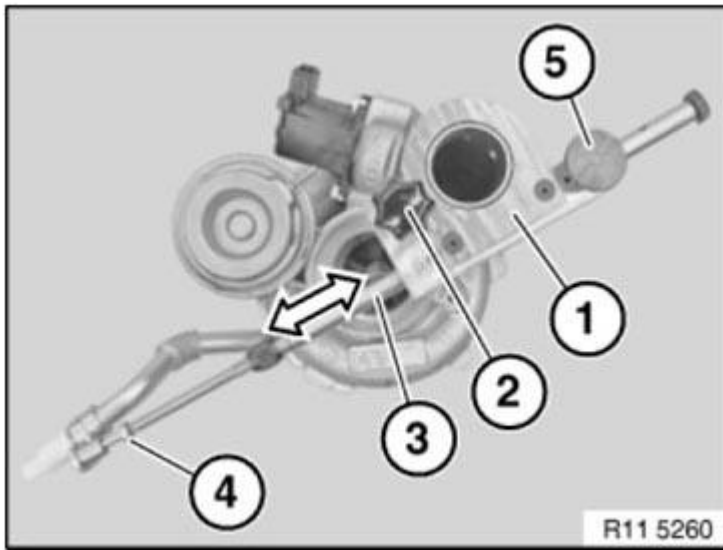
Sliding Screw Shaft Up To Mounting Bolt
